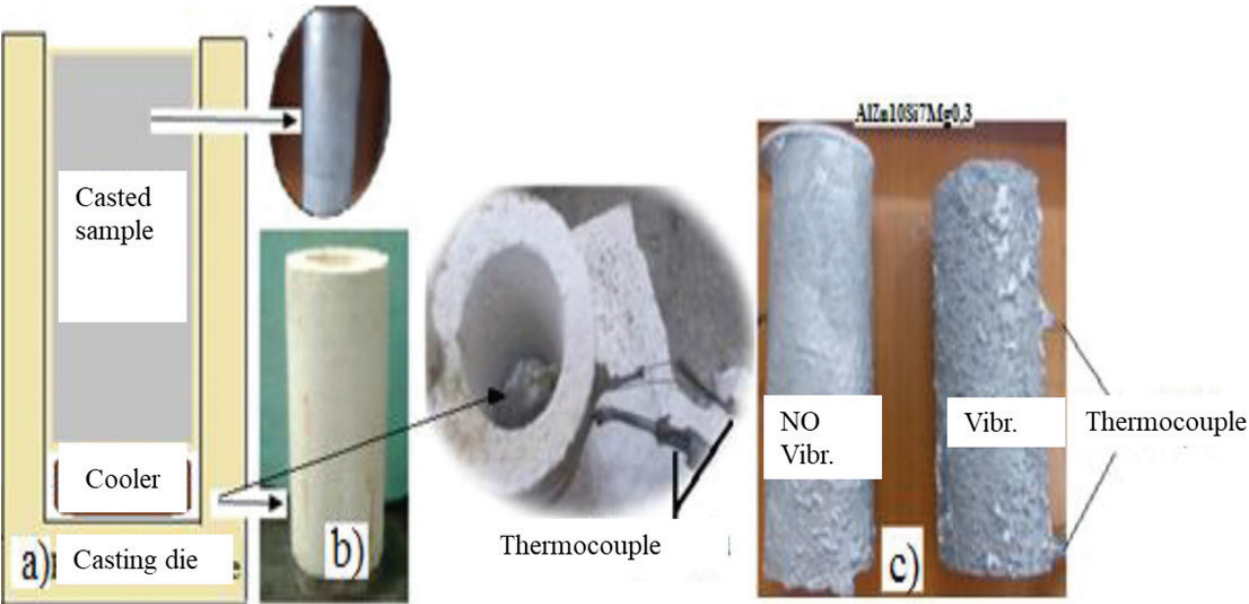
Scheme of the casting (a), crucible with the cooler and the thermocouples before located casting (b) and the samples with no vibration and under vibration [10].
